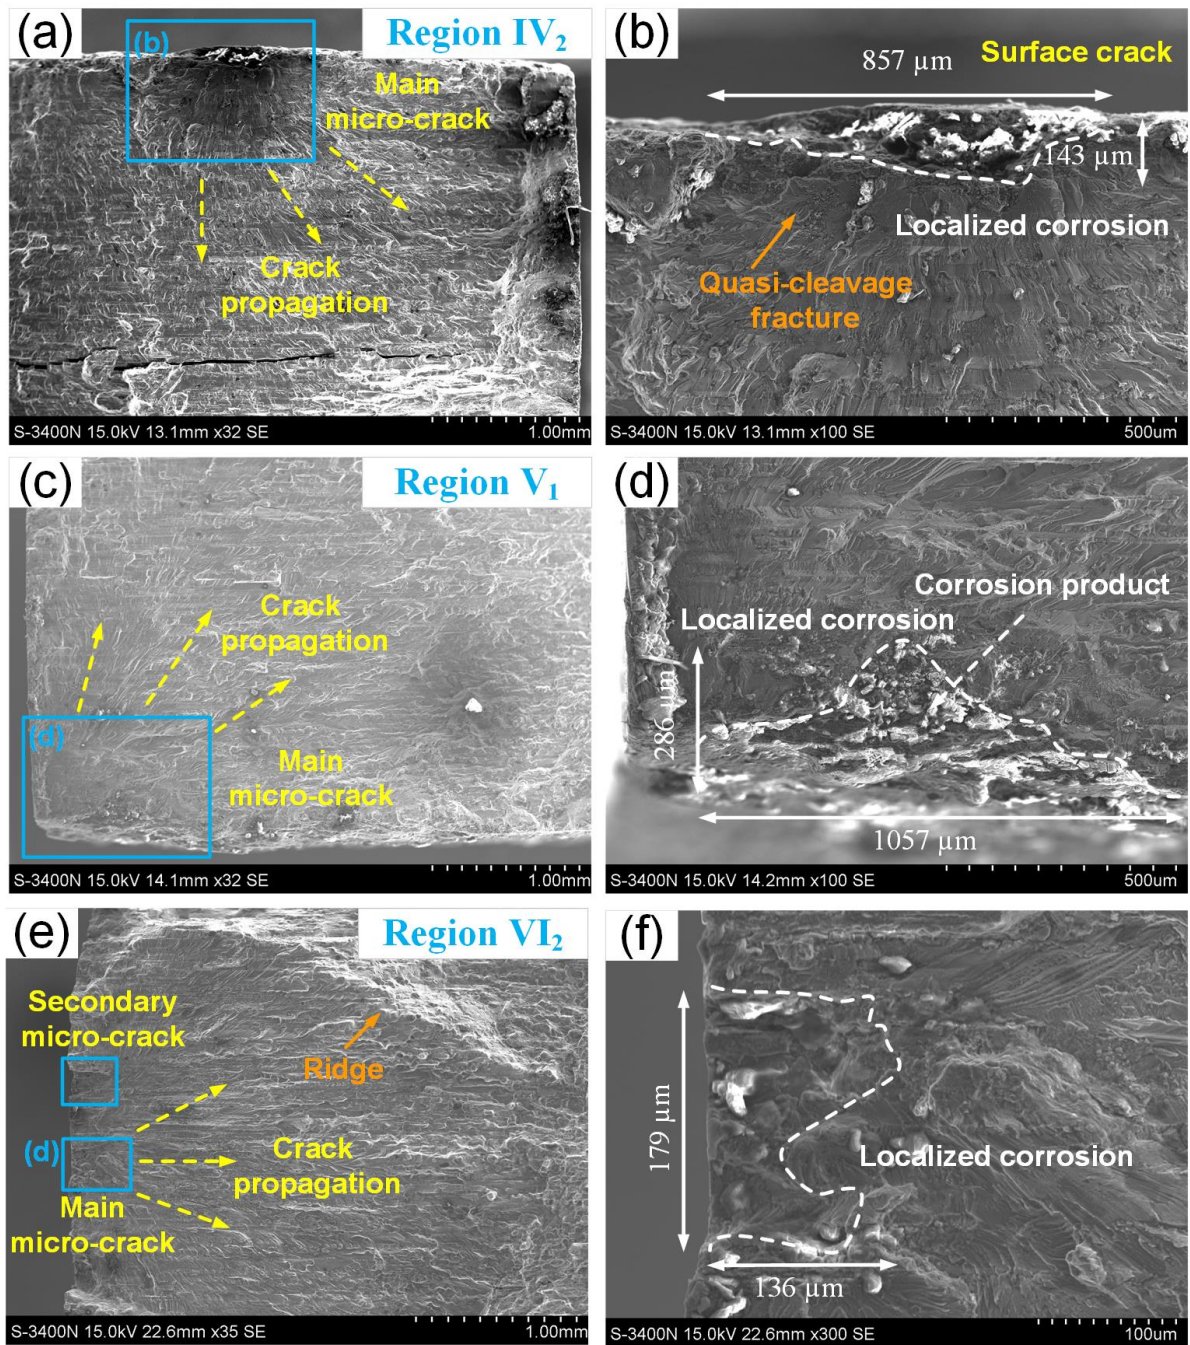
Typical fracture morphology of pre-corroded AA7075-T7651 specimens with a maximum stress of 333
